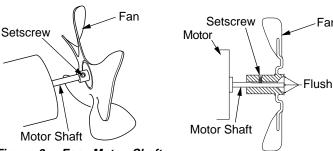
Fan, Motor Shaft, and Setscrew Location
